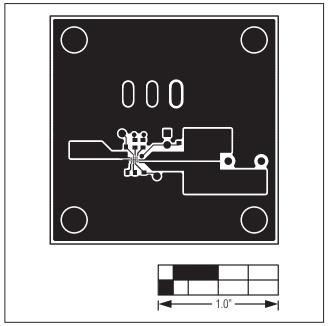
MAX97200A EV Kit PCB Layout—Component Side
